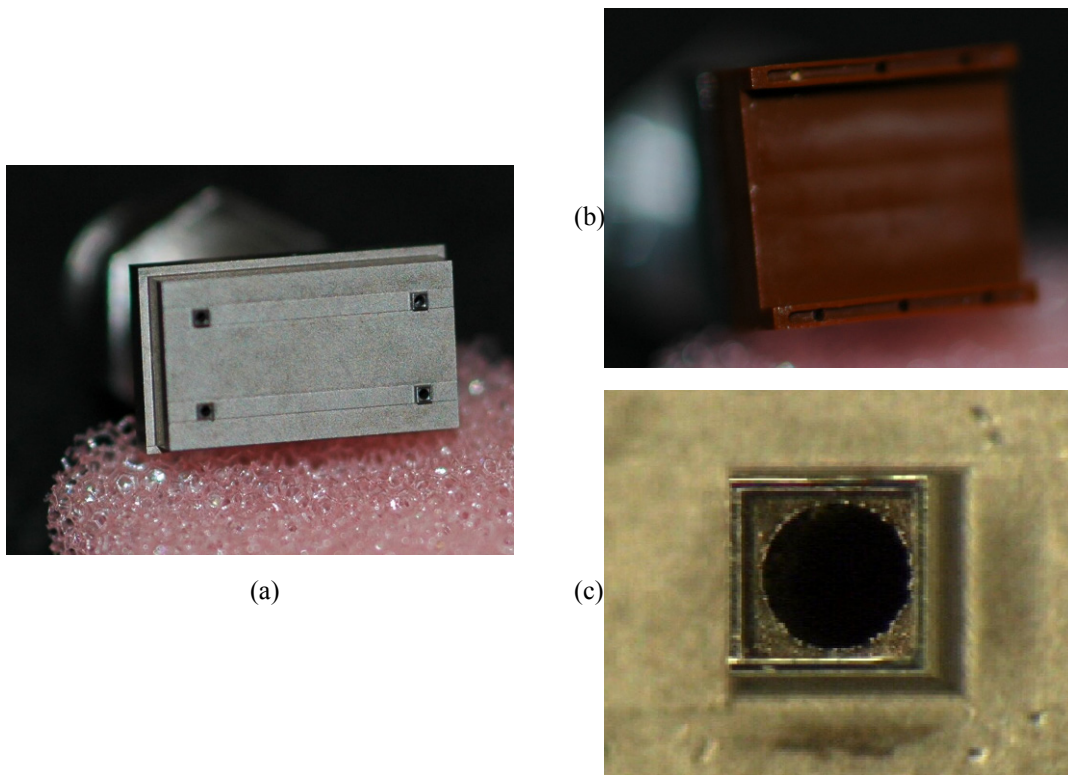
Single mod tool (a), double mod tool (b), and close-up of vacuum hole in tool stanchion (c).
